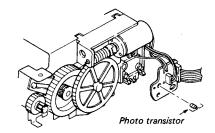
Replacement photo transistor on FL P.C. board (R)
